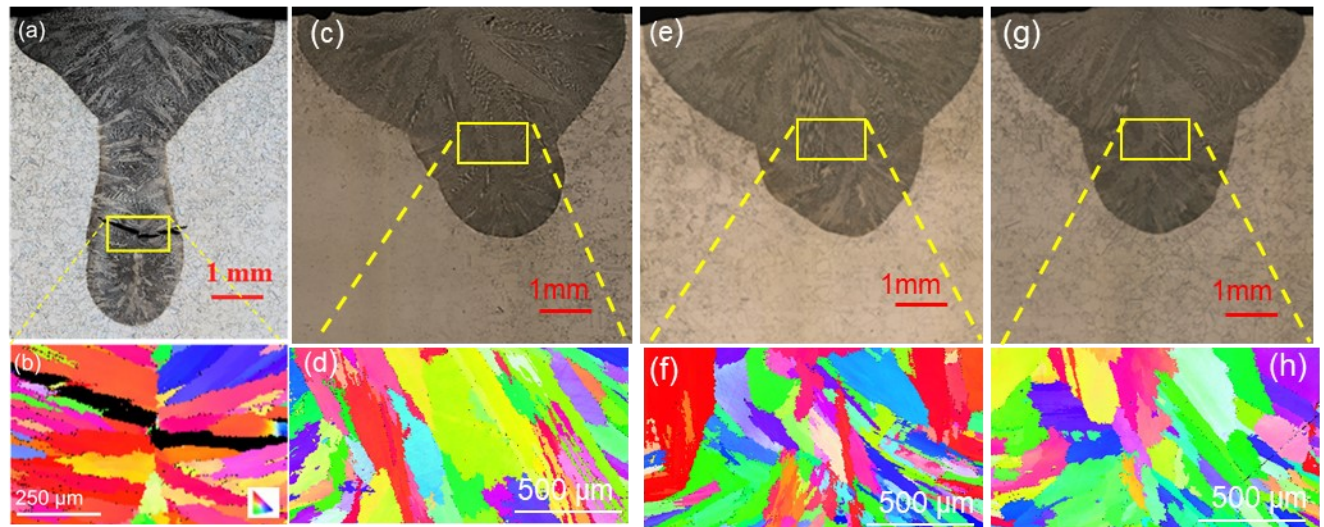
(a) Crack in fusion zone of laser weld without wobble for 5 kW, 12.7 mm/s. Wobble laser welds for 5kW, 12.7 mm/s with 1.6 mm amplitude and frequencies of (c) 150Hz, (e) 300 Hz and (g) 475 Hz showed no cracks. Corresponding IPF maps of the weld are shown in (b), (d), (f) and (g).
